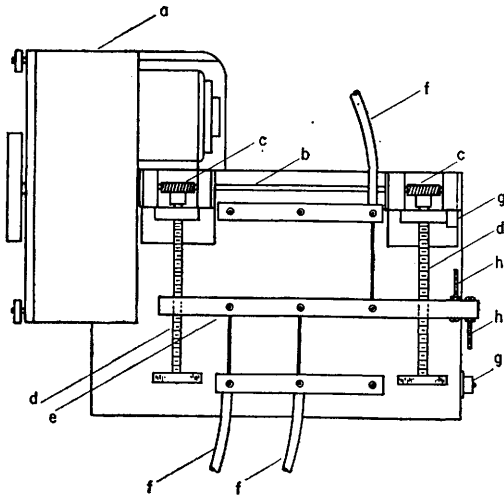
Variable-speed drive assembly. (a) Harvard multi-speed transmission, (b) drive shaft, (c) worm gears, (d) lead screws, (e) drive bar, (f) push-pull wire choke assembly, (g) sub-micro limit switches, (h) contact screws.
